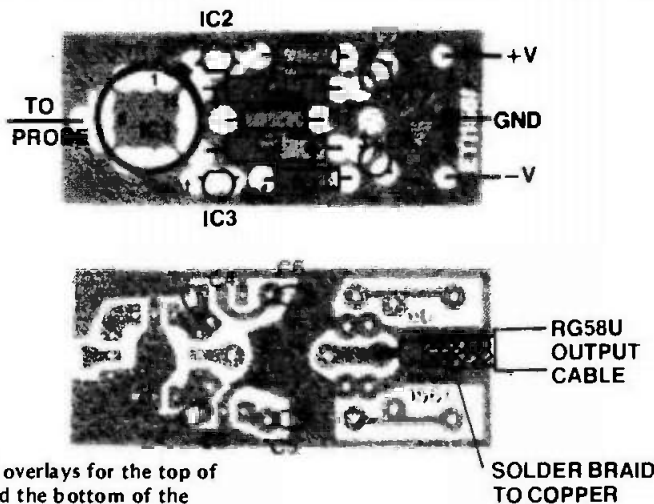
Component overlays for the top of the board (top) and the bottom of the board (bottom!).
